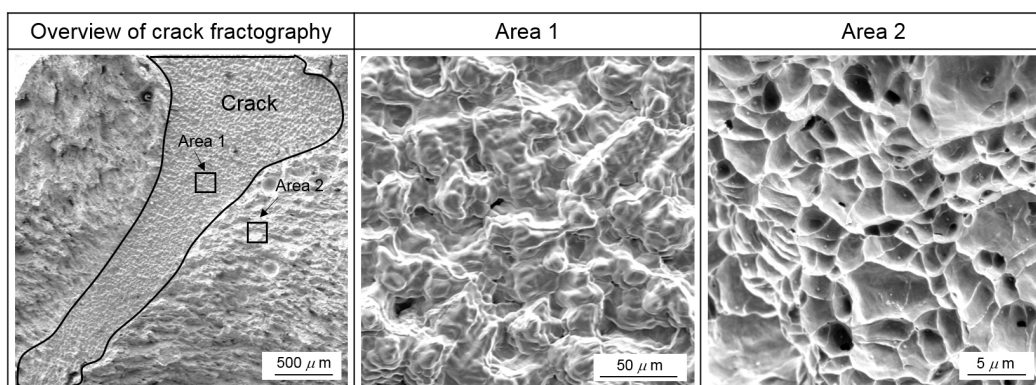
SEM observation photos, showing crack surface and artificially-fractured surface of hybrid weld fusion zone
